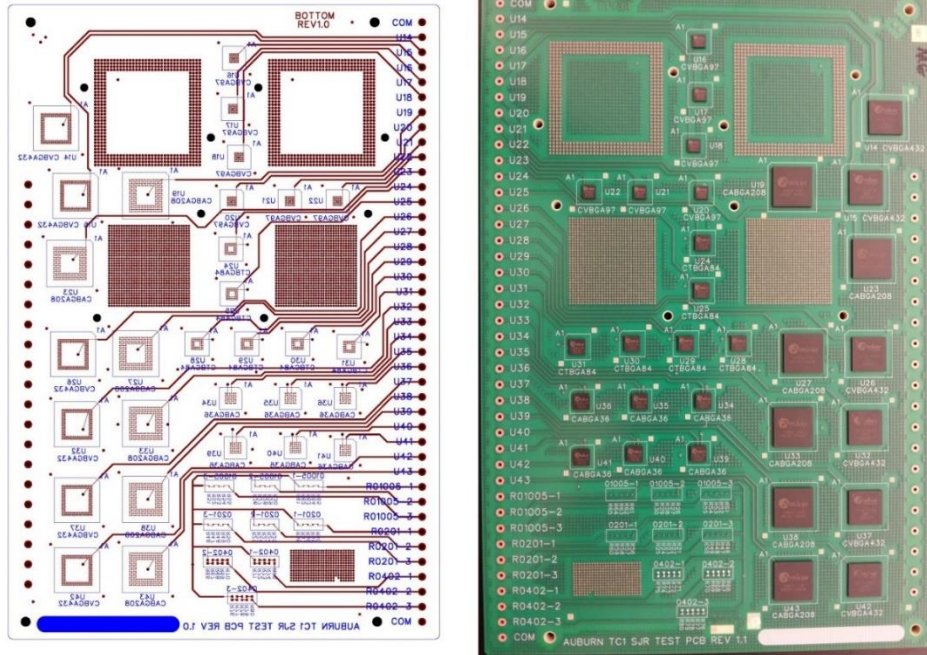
TC2-SRJ Test Vehicle: Bottom-Side View
